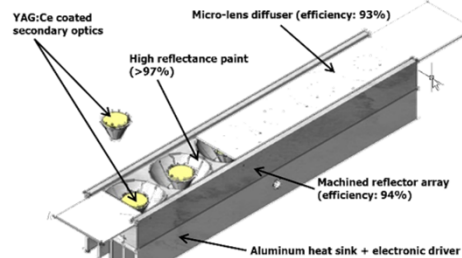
Fixture incorporating six SPE LED packages for clarity.
